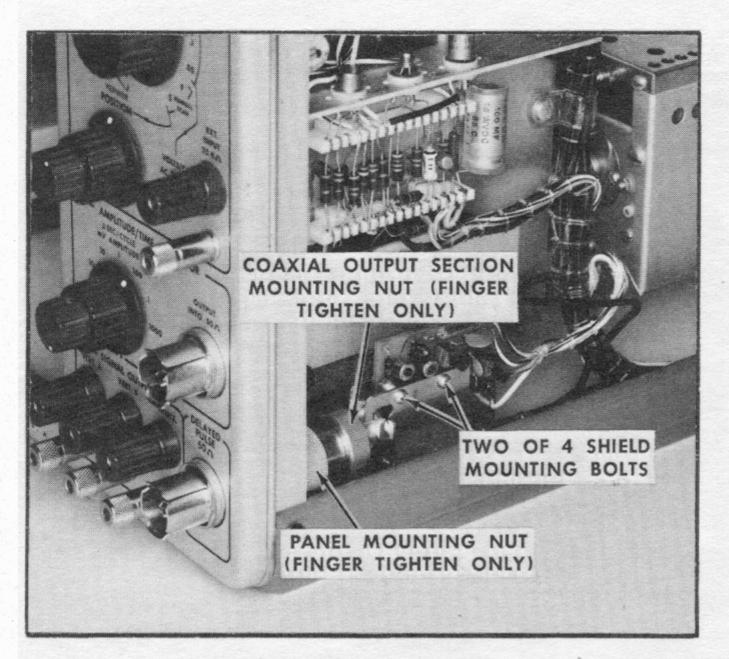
Delayed Pulse Generator mounting nuts and shield bolt locations.
